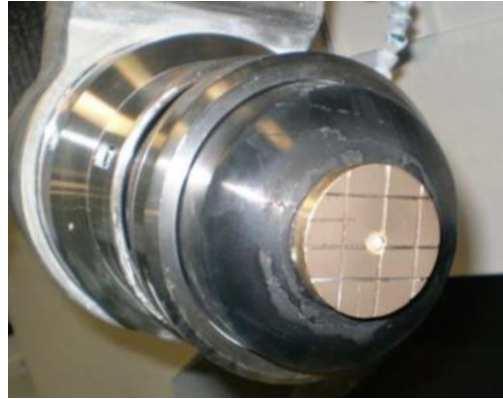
Grolishing tool mounted on a polishing machine.^[8, 9]
